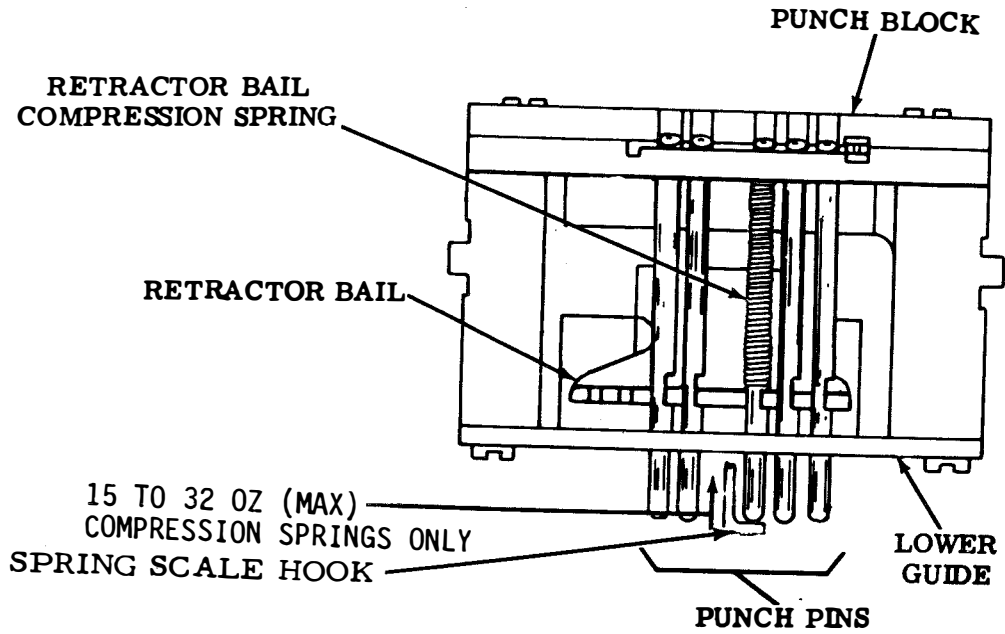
Retractor Bail Springs (Chadless Tape Mechanism)
